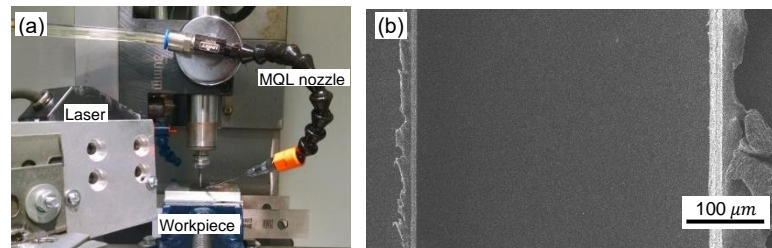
(a) Experimental setup from micromilling, including the MQL nozzle, laser displacement sensor (Keyence LK-G82) for alignment and 316L stainless steel plate (30×40×0.5 mm) on the workpiece holder, (b) SEM image of a channel segment on workpiece machined using an uncoated tungsten carbide tool with $\Phi 0.406$ mm and concavity angle of 7° . (reprinted with permission)
